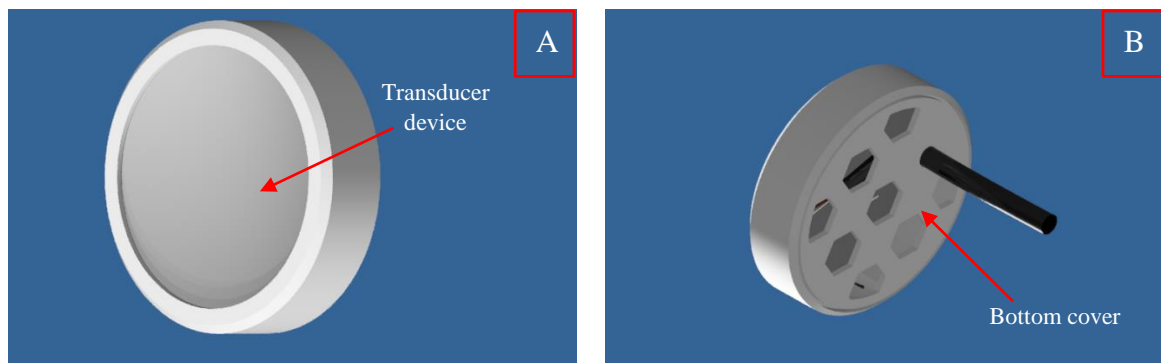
CAD drawing of the transducer, A) top view), B) bottom view.
